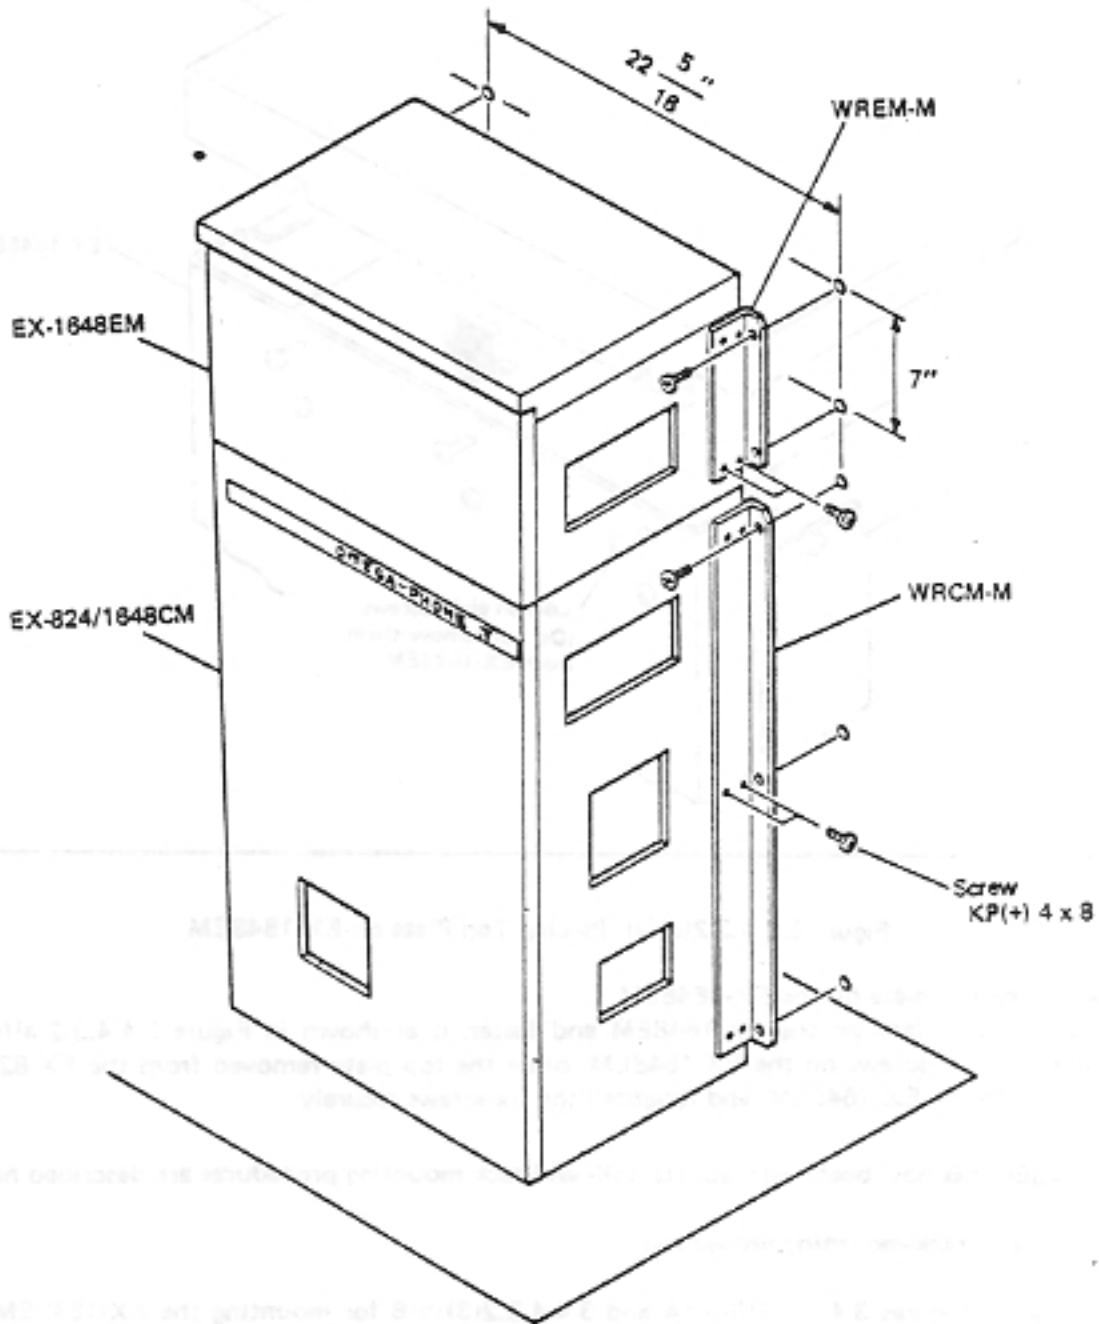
(3)(b)A EX-1648EM Wall- or Rack-Mounting Method
